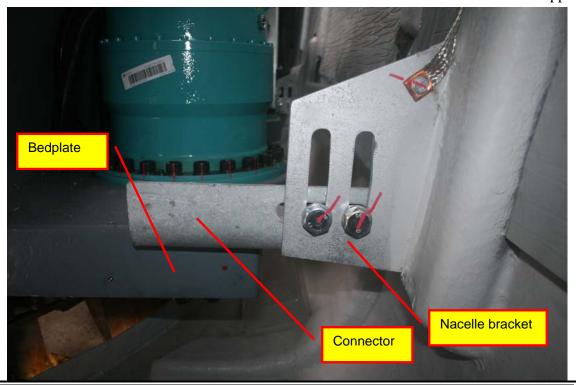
Left front nacelle attachment viewed to the rear. Bolting not moved.
